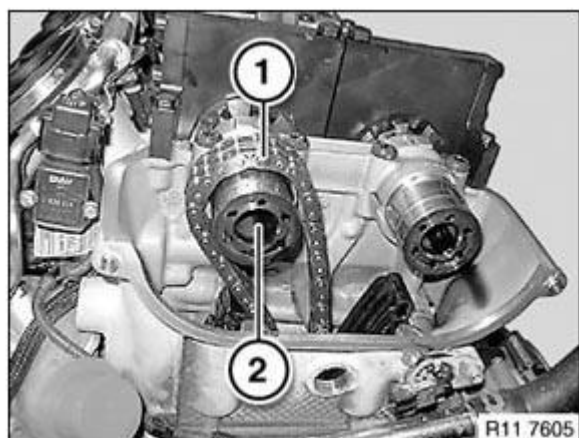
Identifying Special Tool (11 5 291 And 11 5 292)
